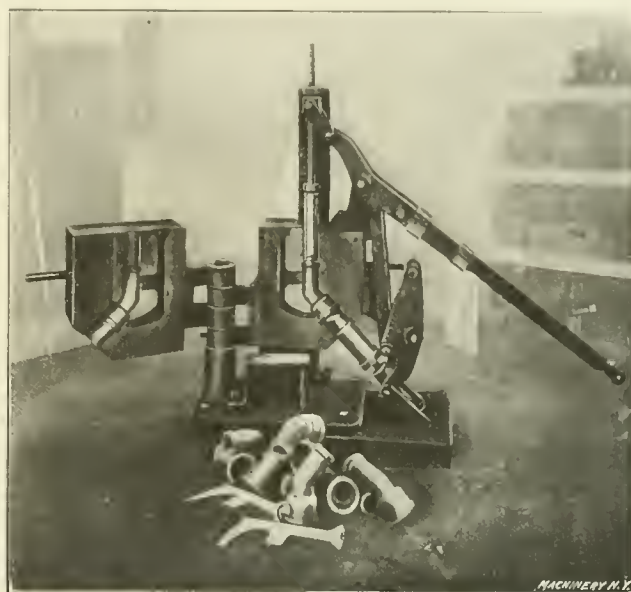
Mold opened, Cores withdrawn and Casting removed
